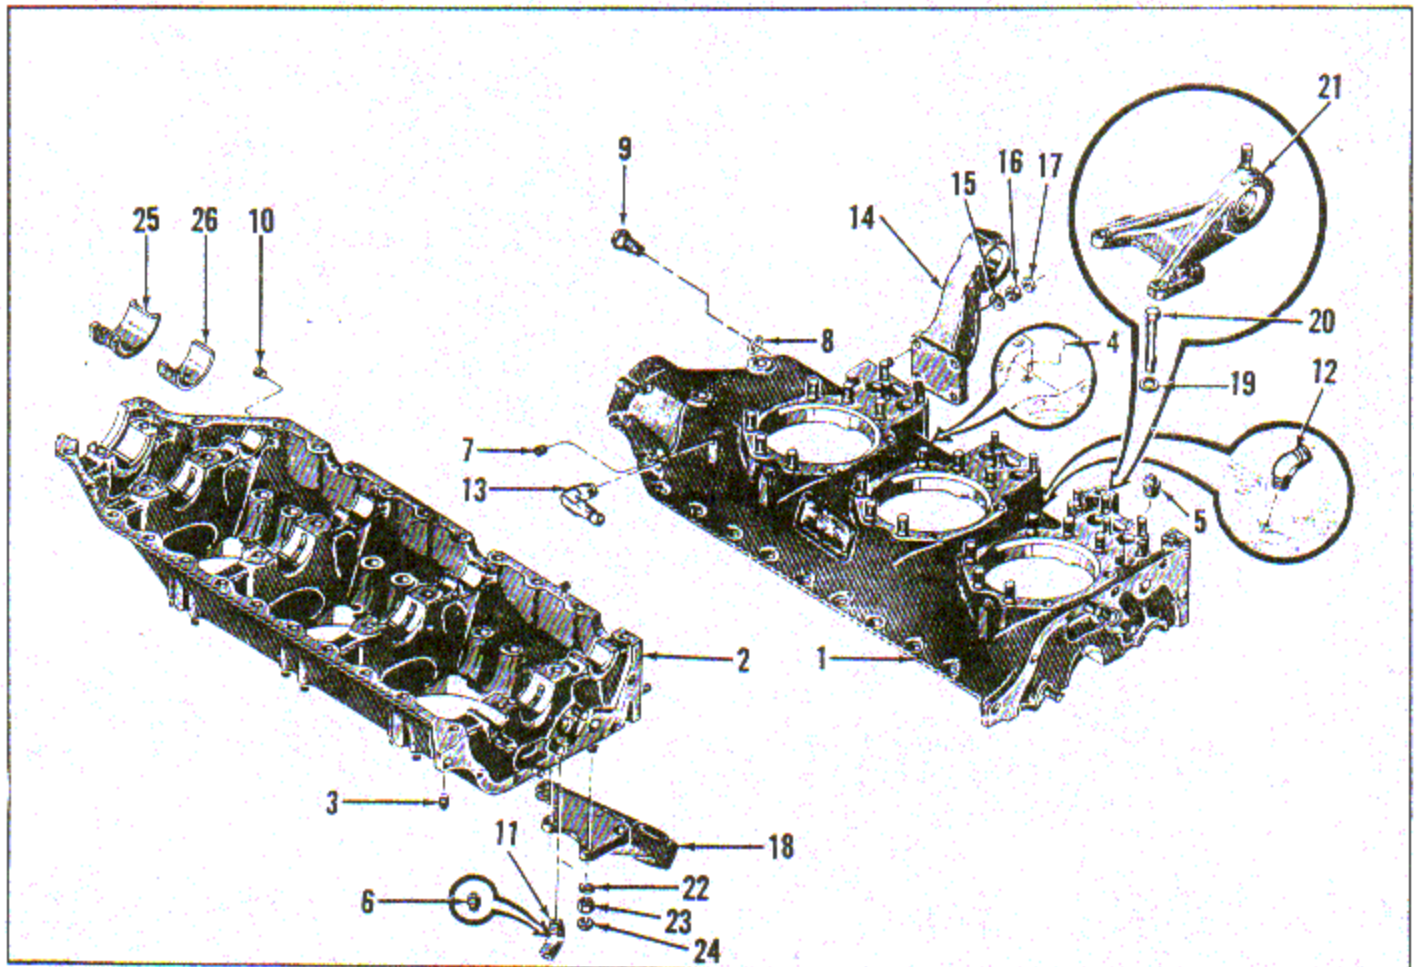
Crankcase Subassembly Procedure (Sheet 1 of 2)
